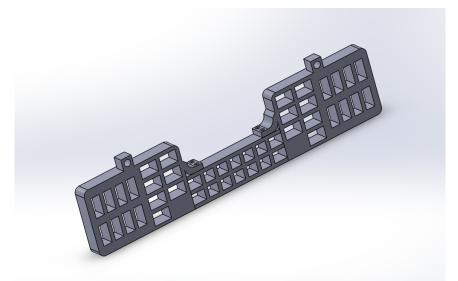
The three grid pieces, left, centre and right assembled in Solidworks.
